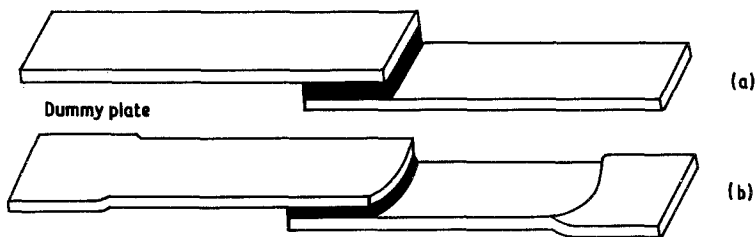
Lap-shear test assembly: (a) conventional; (b) corroded tube section.
